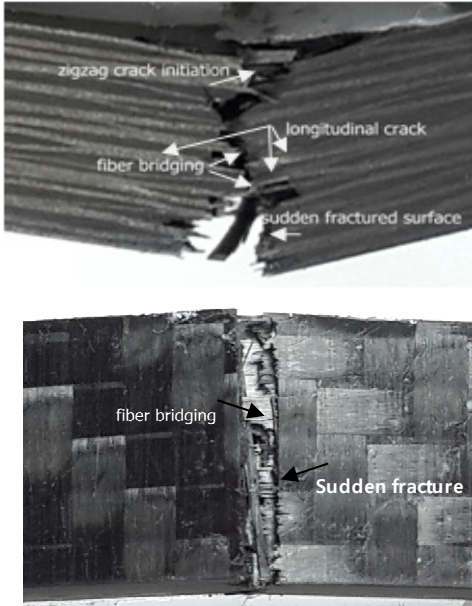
A front and bottom side of fractured specimen viewing the cracks and fiber bridging phenomena.
